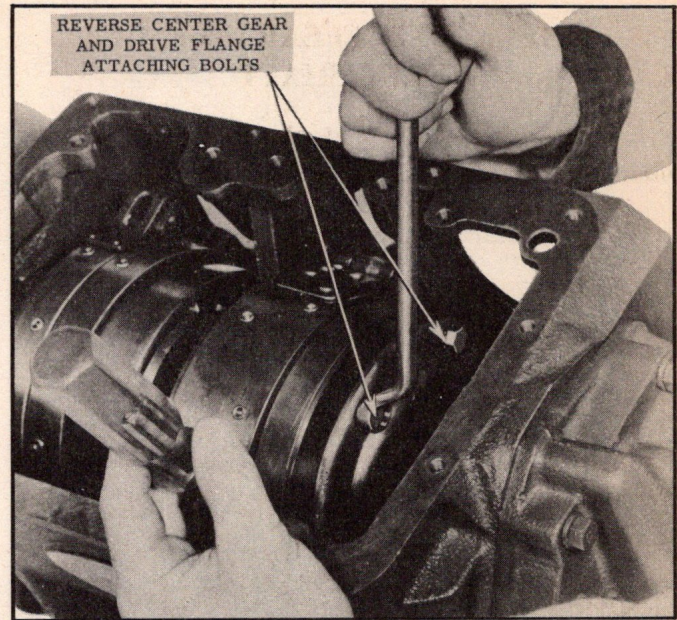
Removing Reverse Center Gear and Drive Flange Attaching Bolts
